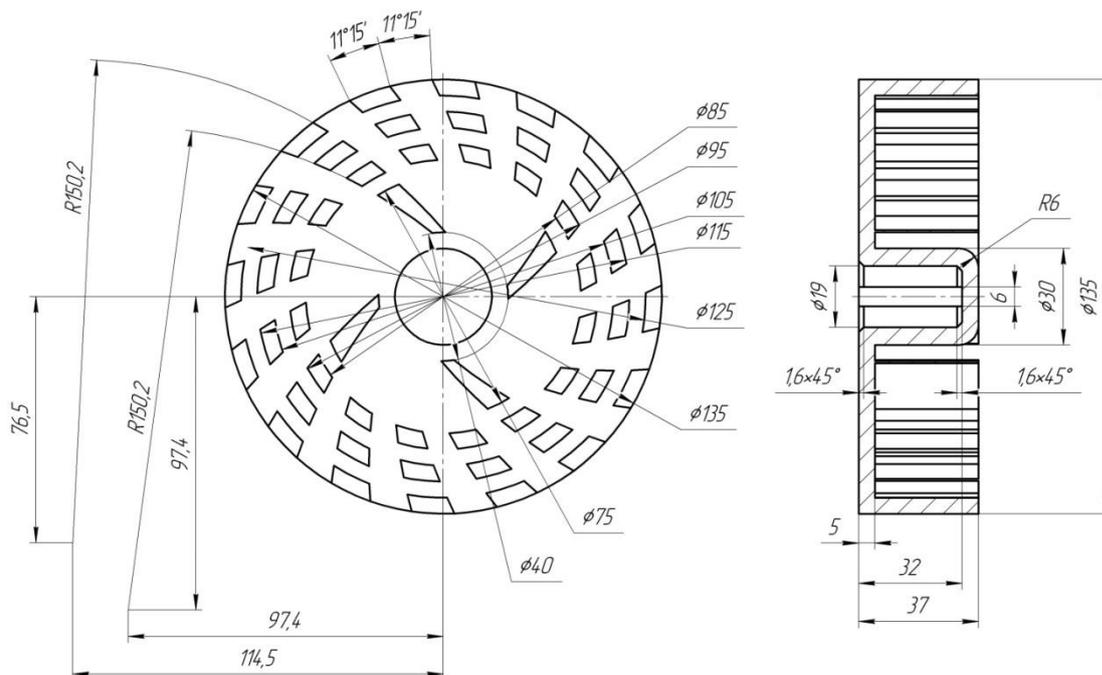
Geometric dimensions of the rotor of the rotary cavitation disperser-homogeniser
